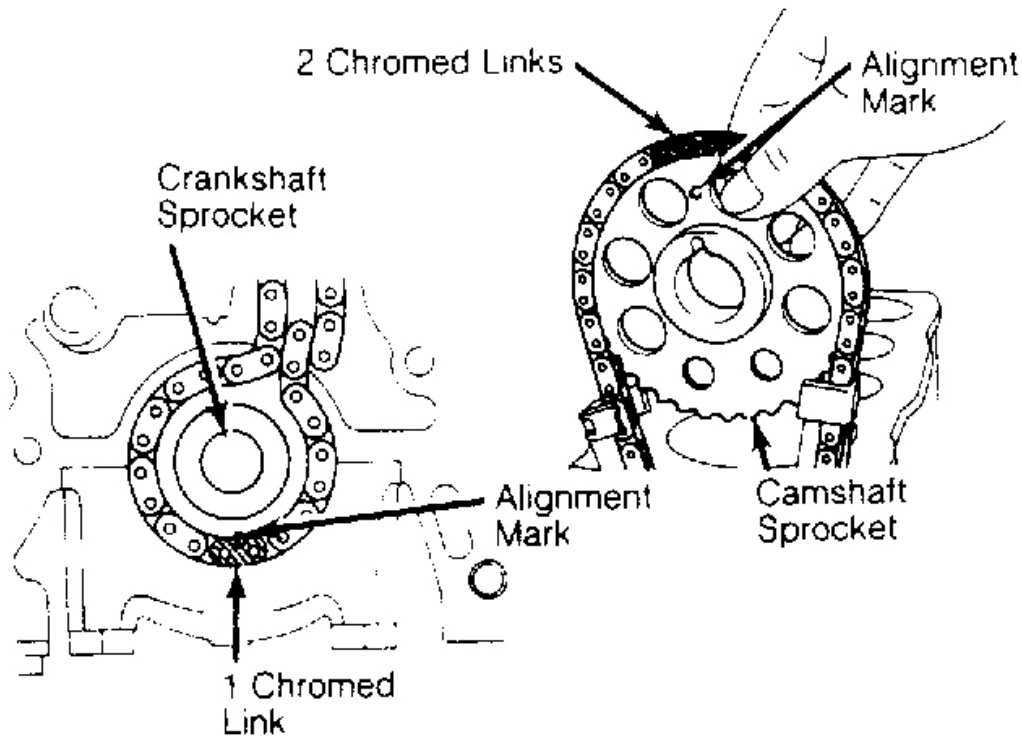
Aligning Camshaft Sprocket & Timing Chain
